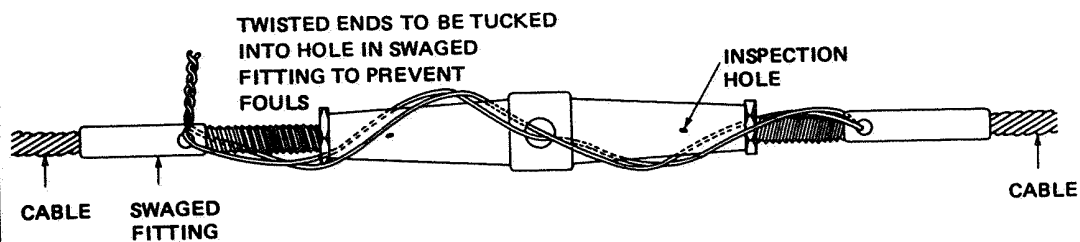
WIRE-LOCKING OF TURNBUCKLE WITH SWAGED END-FITTINGS
